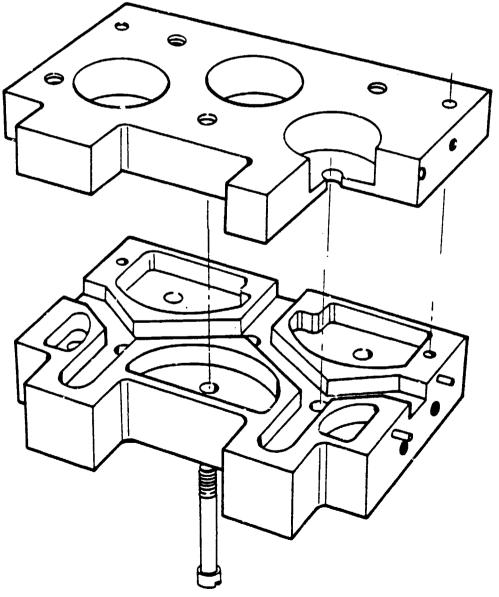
Production Circulator Housing Design Example Shows Three-Junction Circulator
